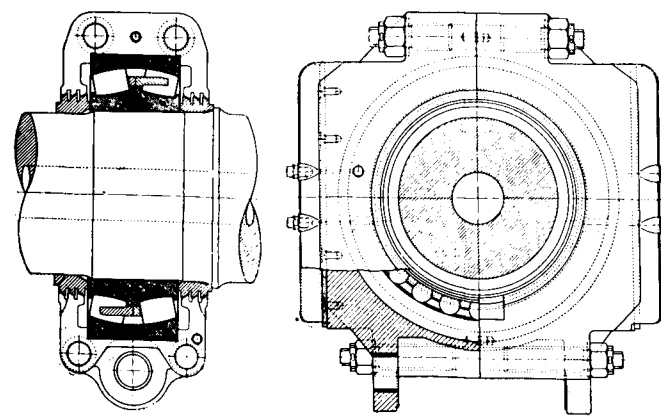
Single bearing axlebox for the driving and coupled axles of steam locomotives.
